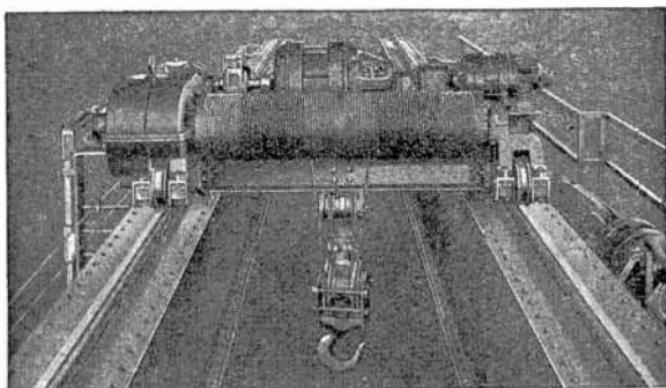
,877.—*Euclid crane construction 4. Another view of mill type trolley showing track wheel bearings. The drum is scored right and left hand, so that the load is always equally distributed on both girders. This cut also shows the separator girt connecting the two side frames.
